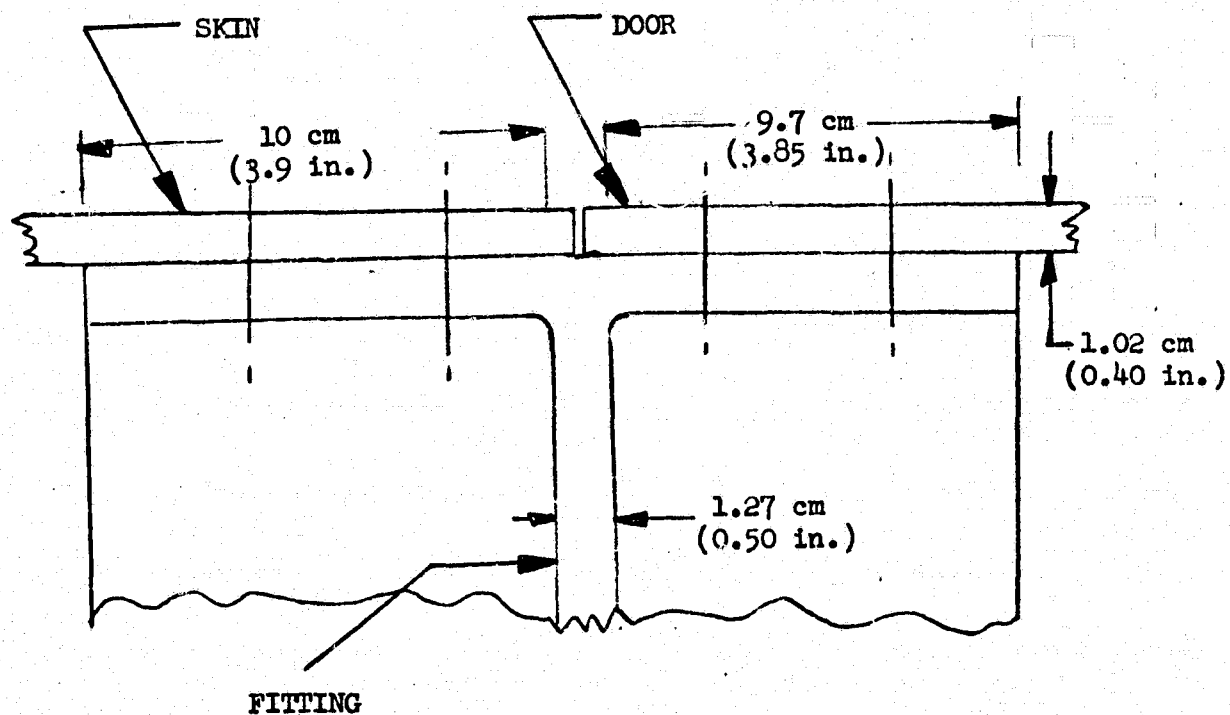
Joint of Upper Flange of Wing Bearing Fitting to Skin and Structural Door.
